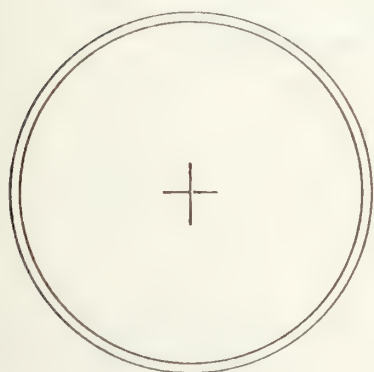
PIECE I-3-3, DRIVE CORE NUT
